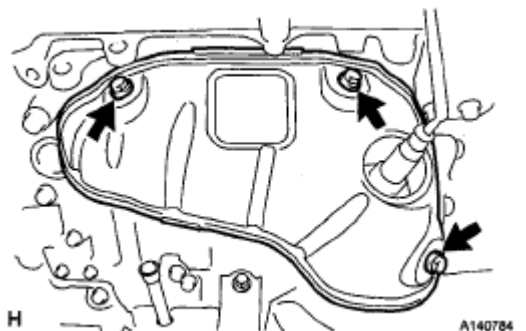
Removing No. 2 Exhaust Manifold Heat Insulator
